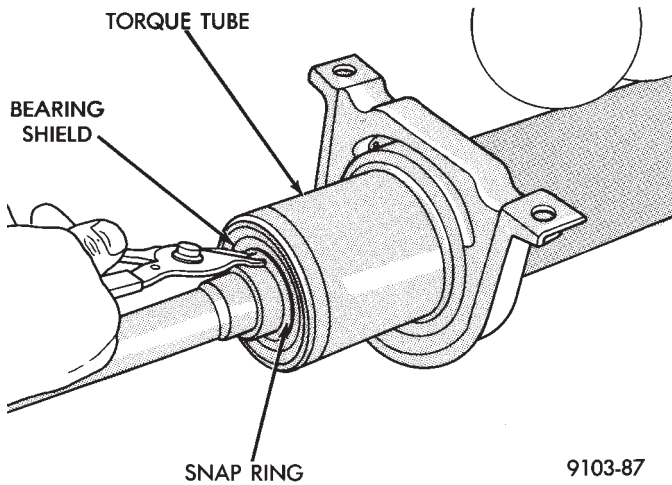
Remove Torque Shaft Snap Ring and Torque Tube Shield
